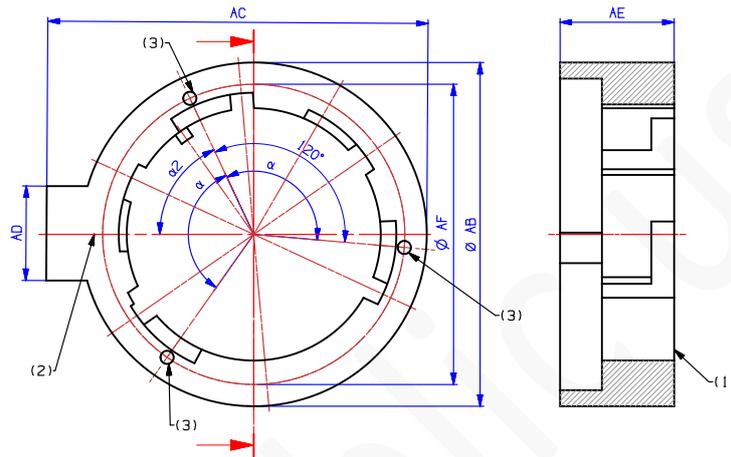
Maximum outline of a Holder (bottom view on the left)
